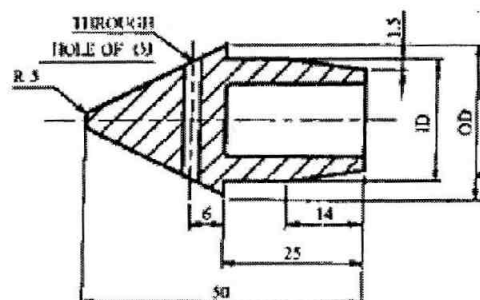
TYPICAL DRAWING OF CAP FOR TUBE END
